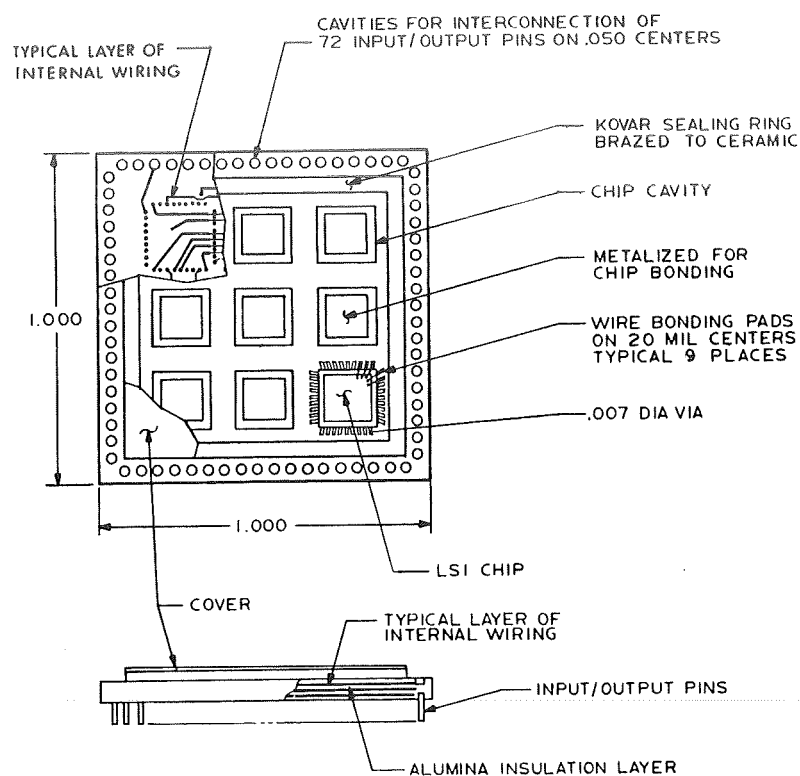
Ceramic multilayer wiring board package for interconnecting and packaging LSI circuits.
